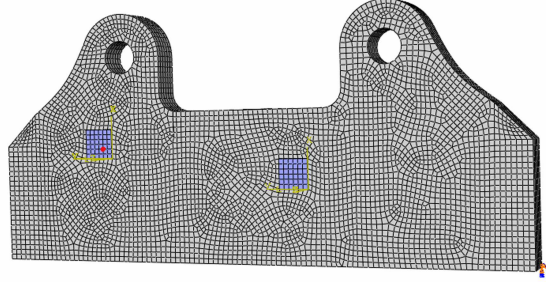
Modeled lug joint sample showing sensor location, crack and dimensions.
